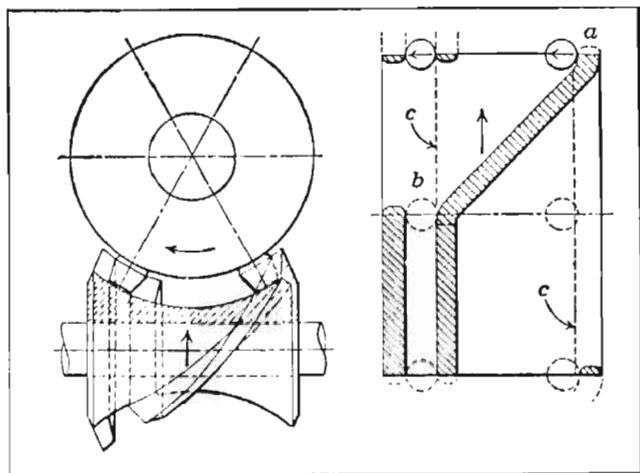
Intermittent Worm-gear Drive in View at Left, with Development of Circumference of Similar Parallel Worm in View at Right.
